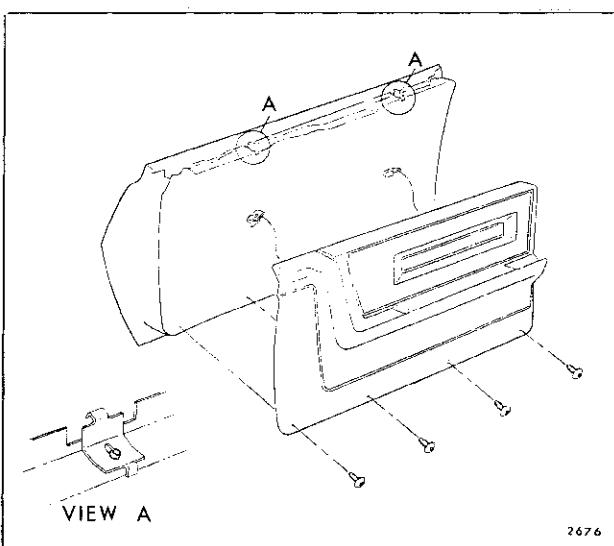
Door Trim Assembly Adjustment - Cadillac "E" Style Shown
